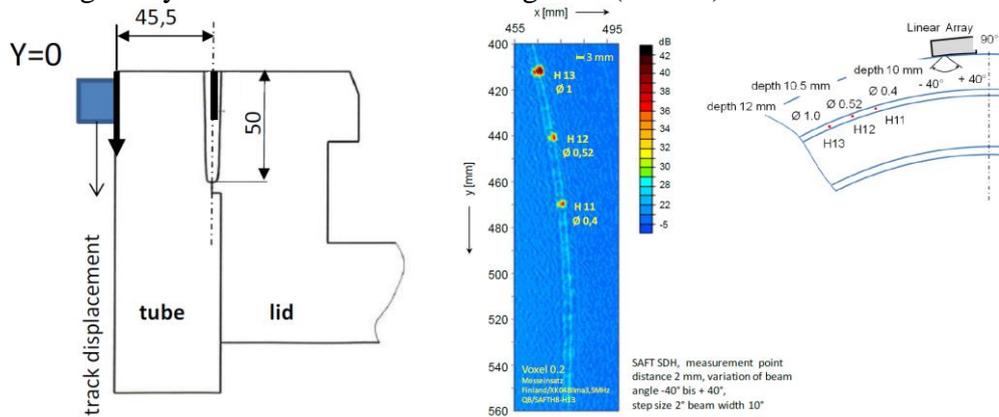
Evaluation and sizing of electron beam weld defects by PC-SAFT
